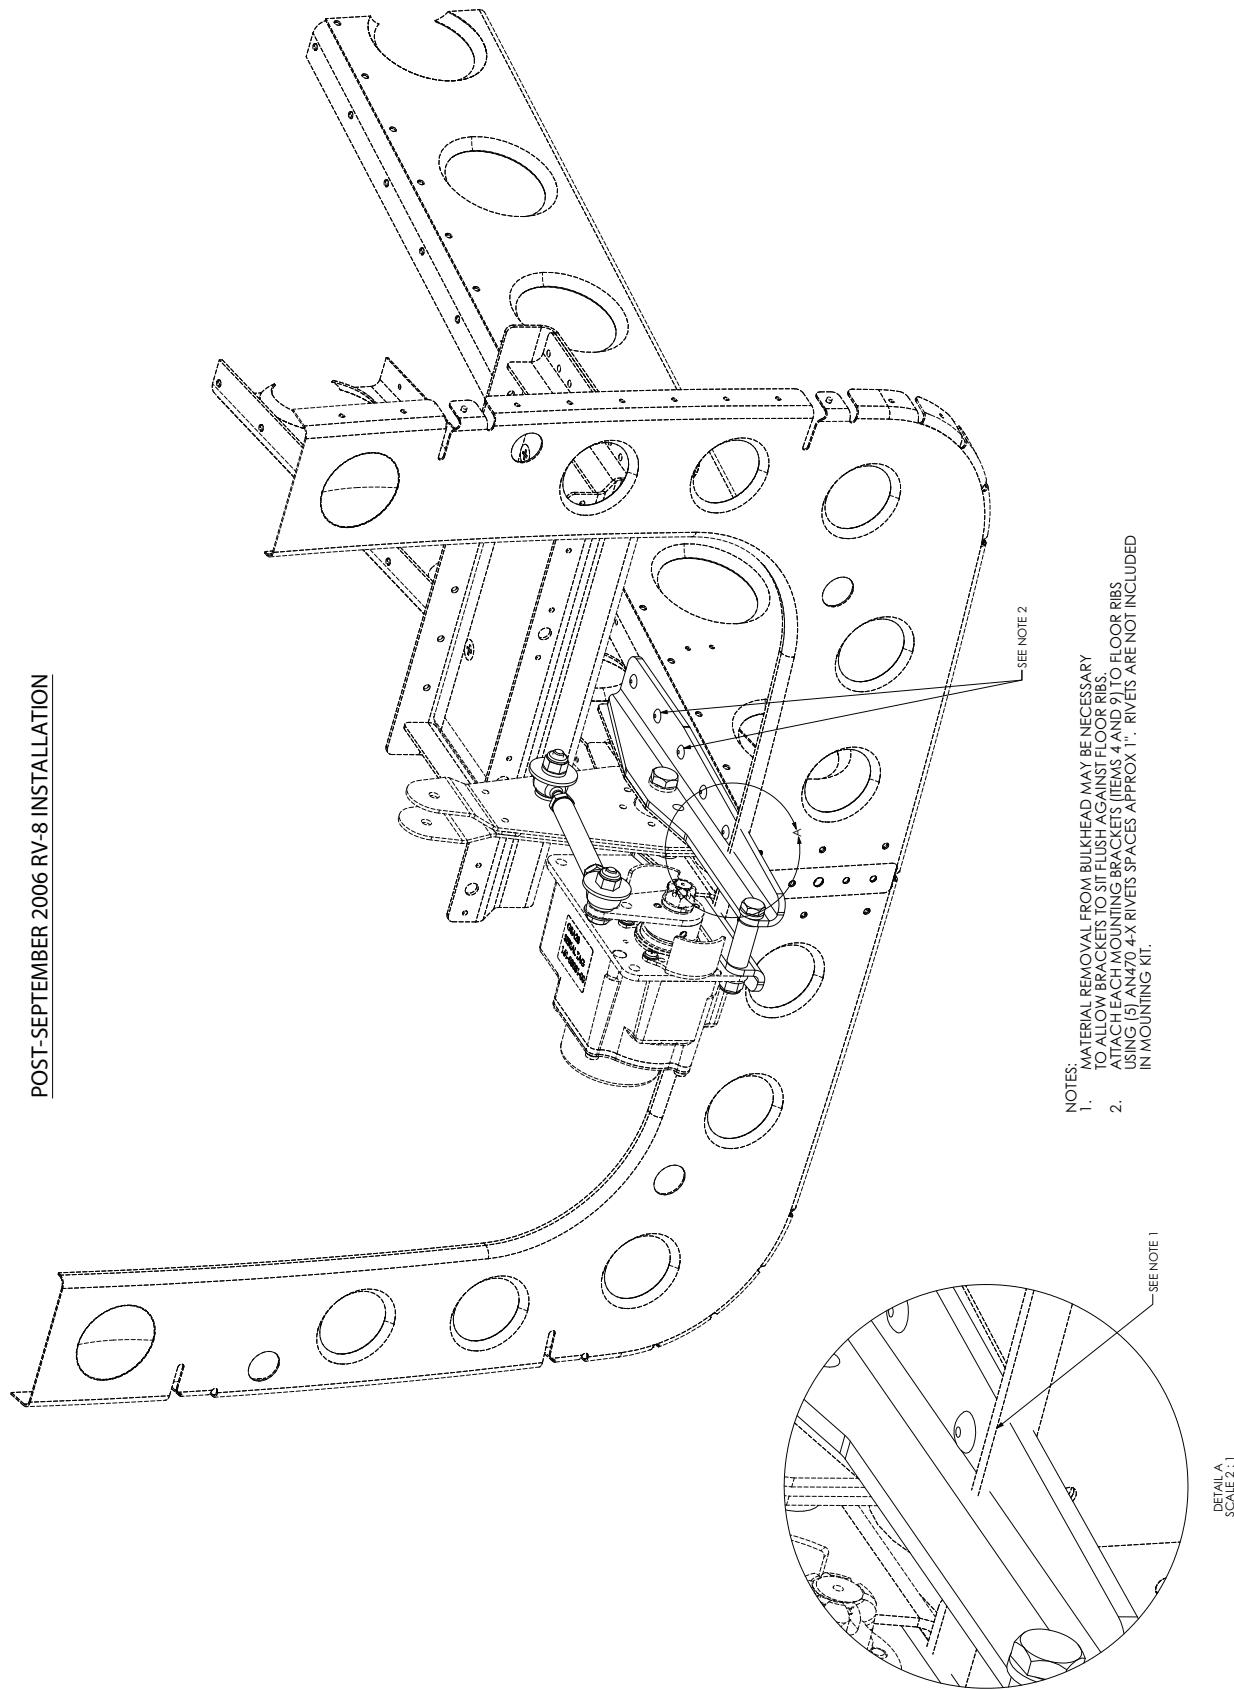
GSA 28 RV-4/8 Pitch Mounting Kit 011-02952-11 (page 4 of 4)
